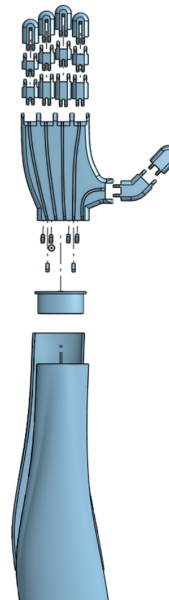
Exploded, palmar view of transradial prosthesis prototype (full forearm and hand)
